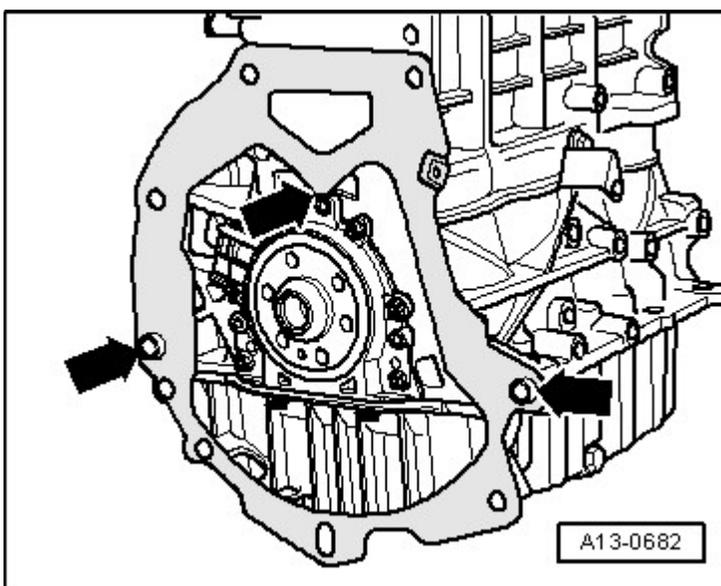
Identifying Intermediate Plate Is Hooked In At Sealing Flange And Is Pushed Onto Alignment
